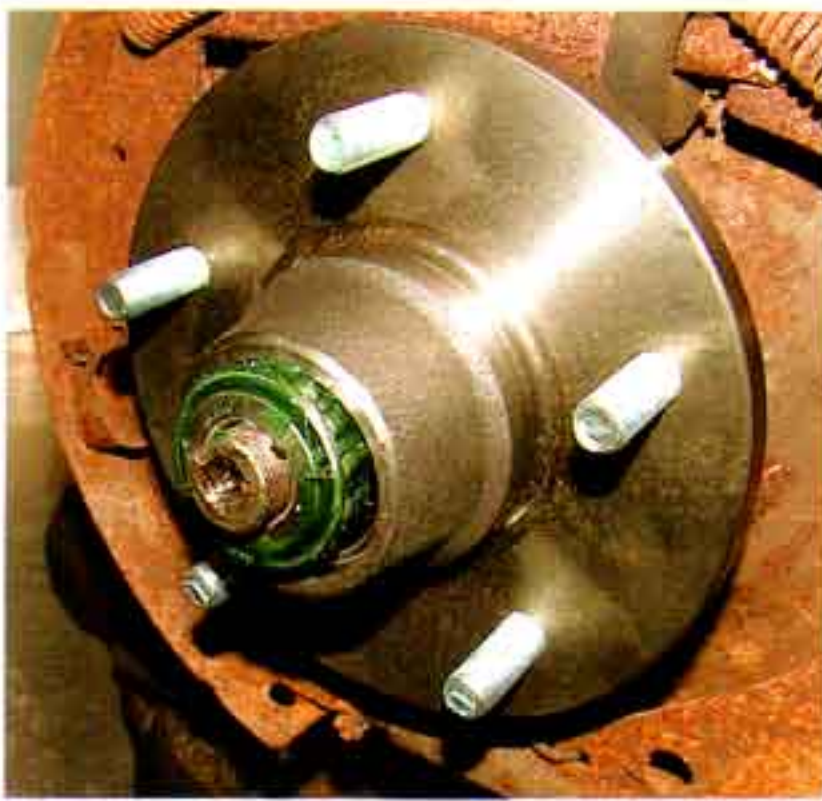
Clean all old grease and dirt from the spindle pin. Now would be a good time to inspect the front brake shoes and hardware and replace if needed.
